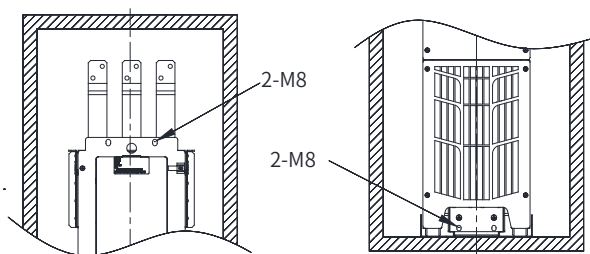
Attaching the basic rectifier module to the quick mounting kit
